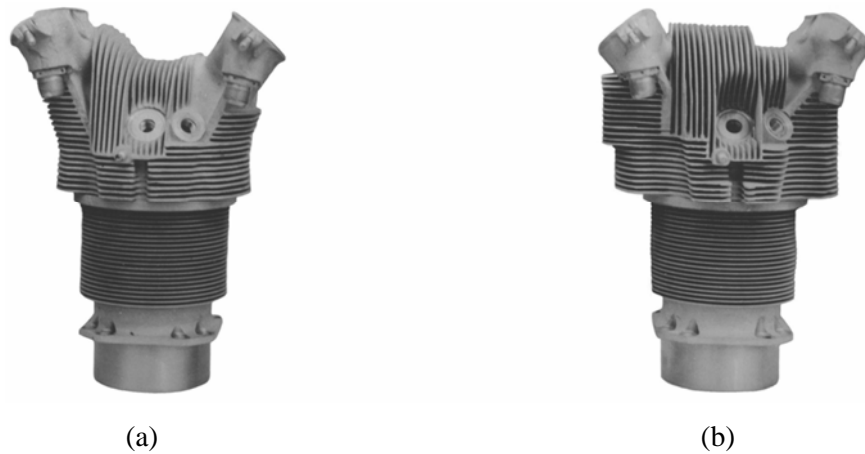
Cylinders of the M-14 family engines: a serial production cylinder (a) and a cylinder with an experimental head (b).
